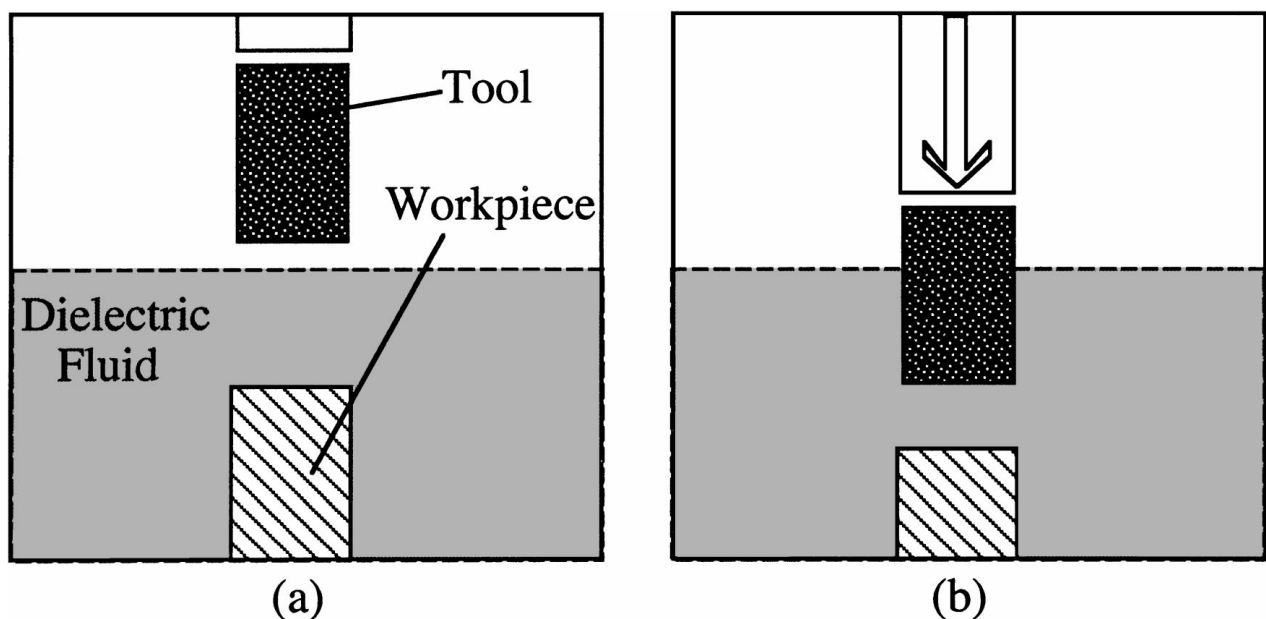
The configuration and setup of both tool and workpiece in the working tank of the die-sinker: (a) before EDM and (b) after EDM.
